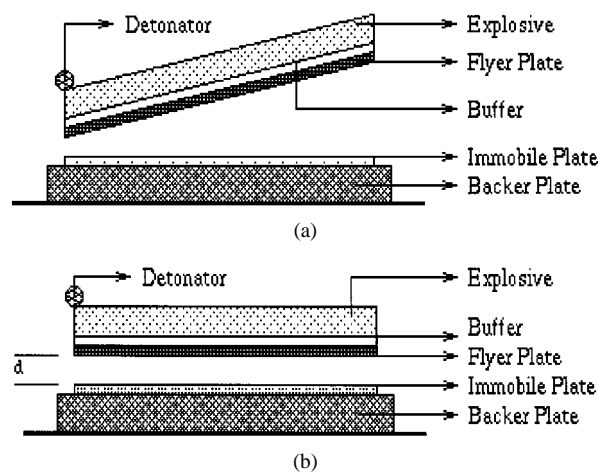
Typical two-plate assemblies for explosive welding: (a) inclined set-up and (b) parallel set-up.
